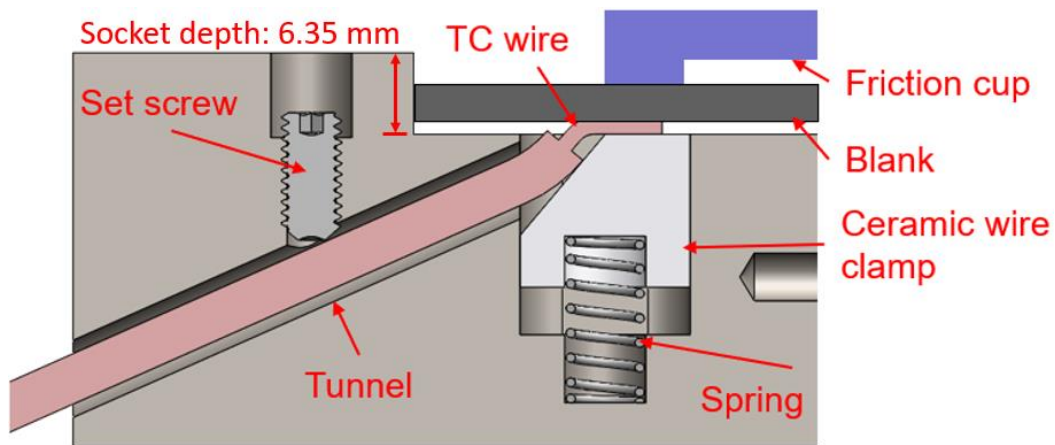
CAD model cross-section of the modified specimen holder showing the interior components.
